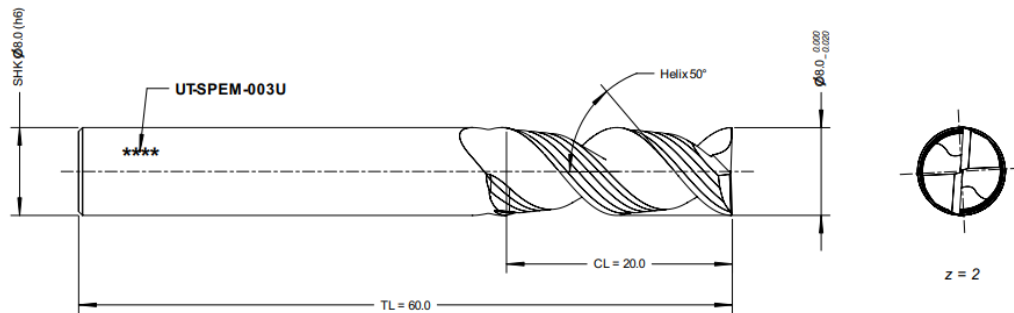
Drawing of end mill carbide with diameter 8mm, 2 flutes and helix angle 50°
